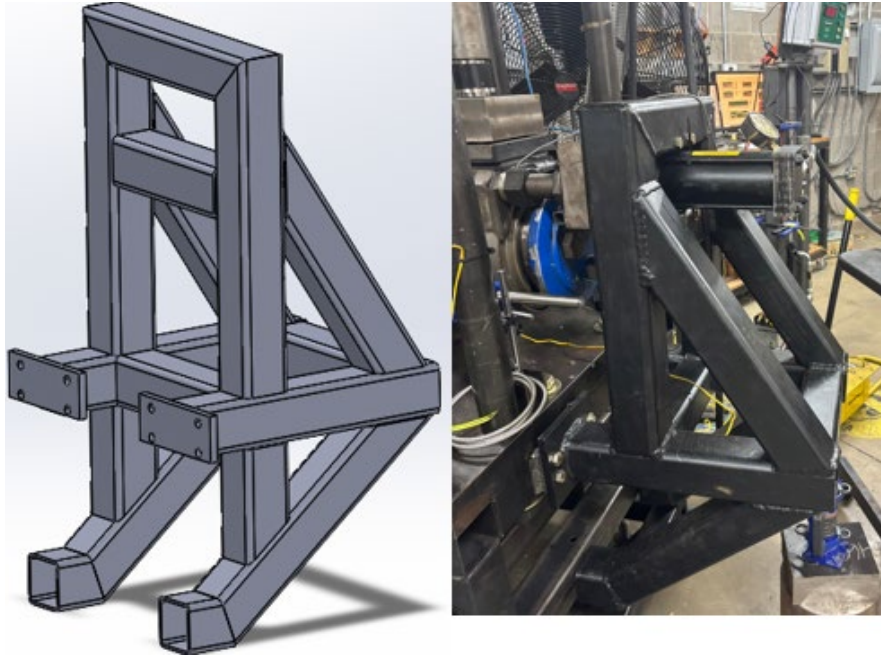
Front ram computer-aided design (CAD) assembly (left) and experimental assembly (right)
